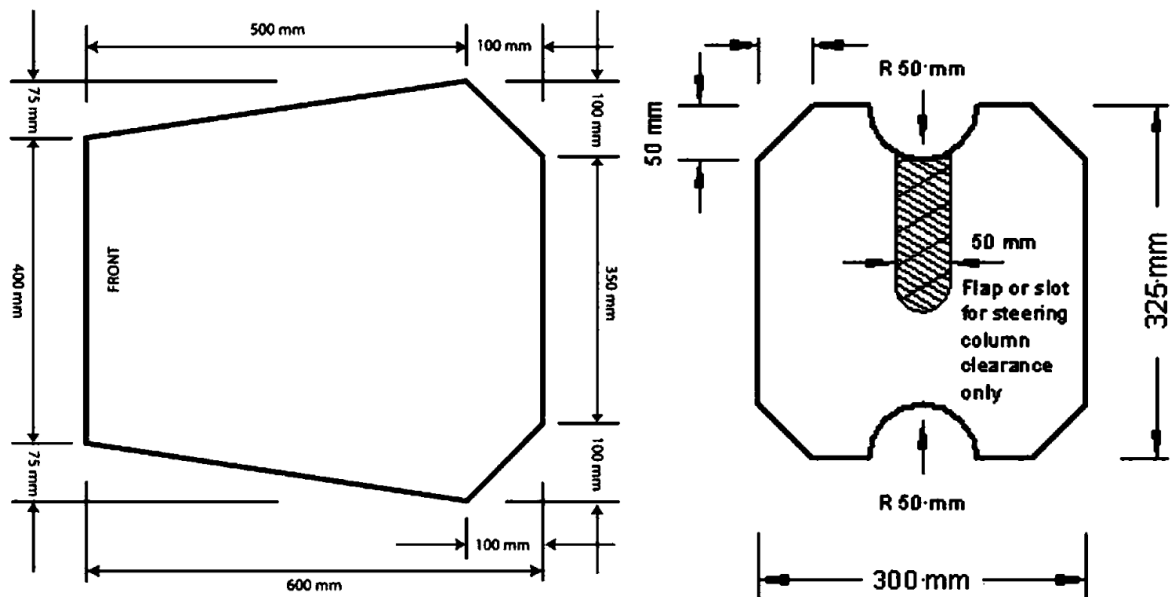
Cockpit opening from the top view and internal cross-section from the side view
